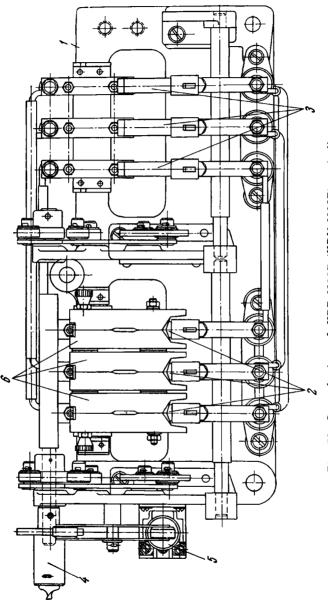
General view of KPB-3006B (KRV-3006B) controller
